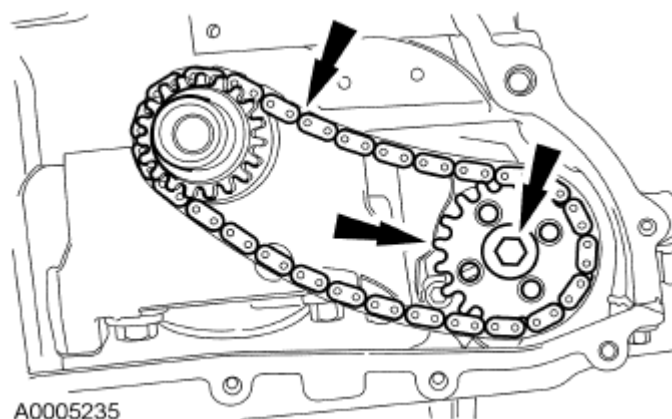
Locating Oil Pump Chain, Sprocket And Bolt
